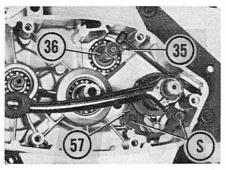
View of the shift assembly on 50 and 80cc models. Refer to text when adjusting.
